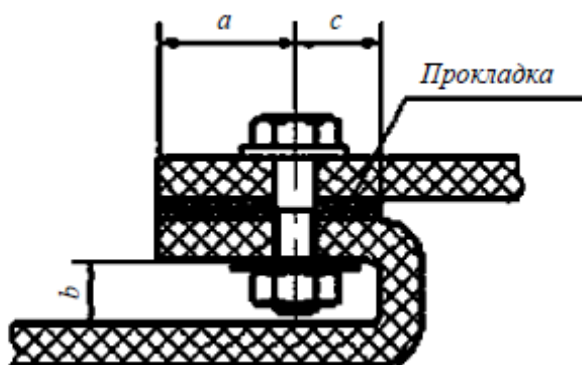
Tank manhole assembly with the flanged shell
